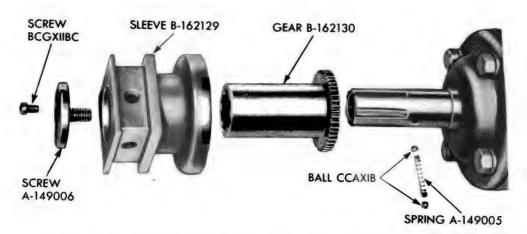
Traversing Mechanism Upper Housing Assembly—Exploded View
